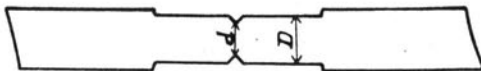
FORM OF IMPACT TESTING SPECIMEN
